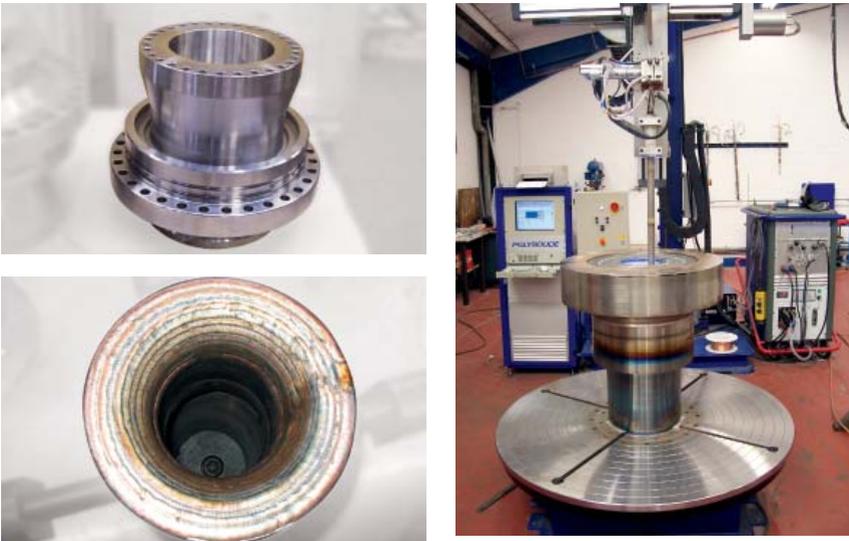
Fixed welding installation for workshop production. Cladding the inside surfaces of a workpiece - wall, edge and bottom - with a nickel-based alloy.
